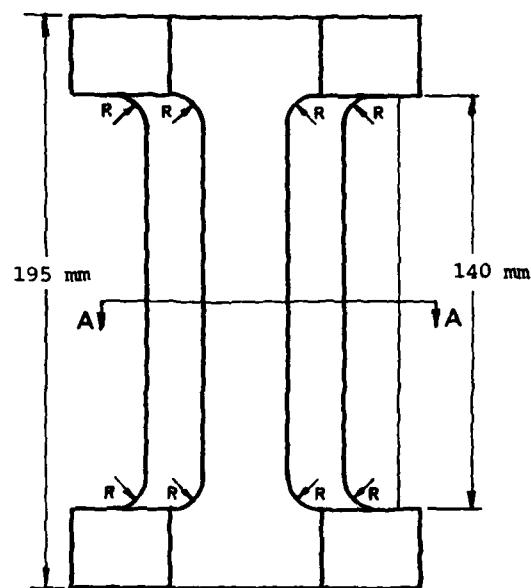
(a) DIMENSIONS OF TEST SPECIMEN
